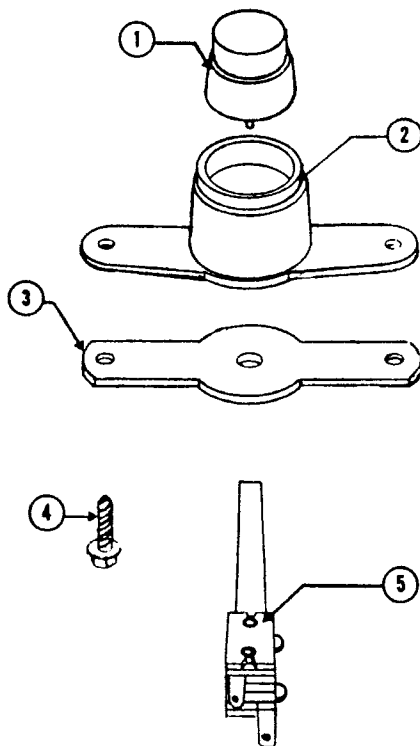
Sling shot kicker coil assembly and parts list.
